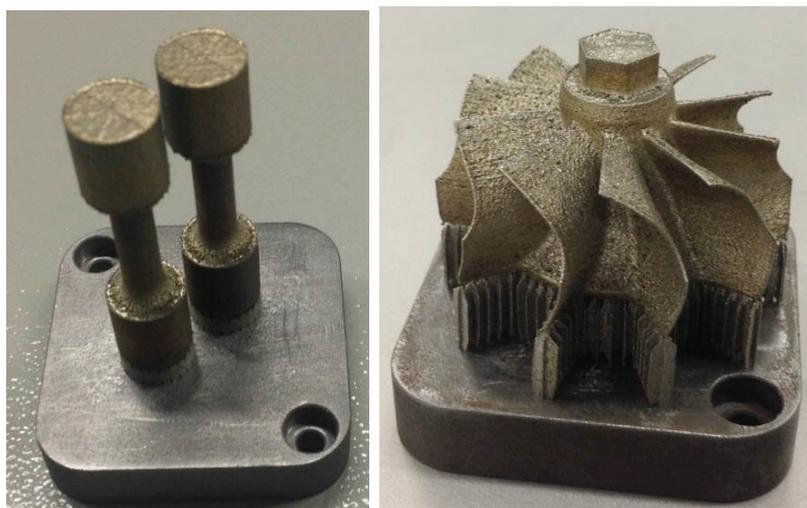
Images of specimens for tensile tests and turbine wheel manufactured by selective laser melting of 316L stainless steel
